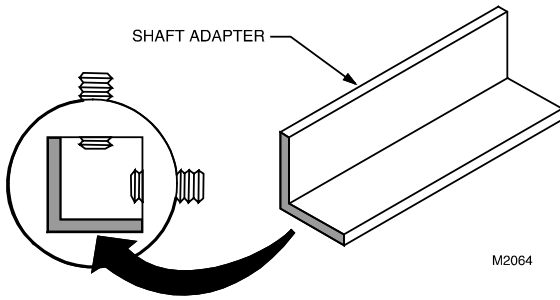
Use damper shaft adapter for 3/8-in. (10-mm) diameter round or square damper shafts.
